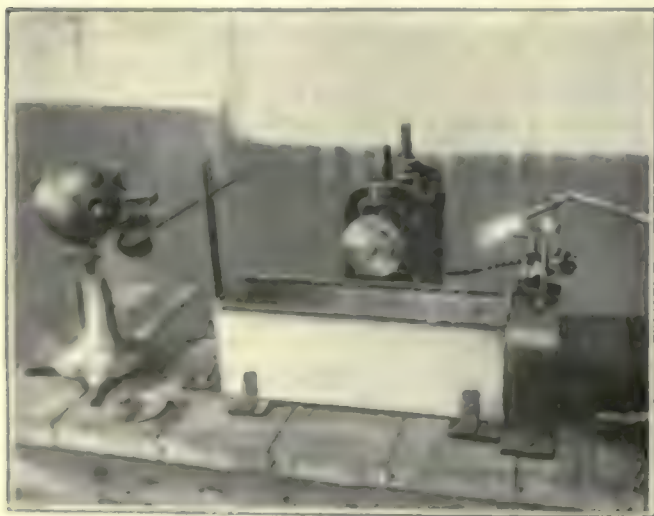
DEVICE FOR CARBONIZING ENDS OF TEETH IN RING GEAR
